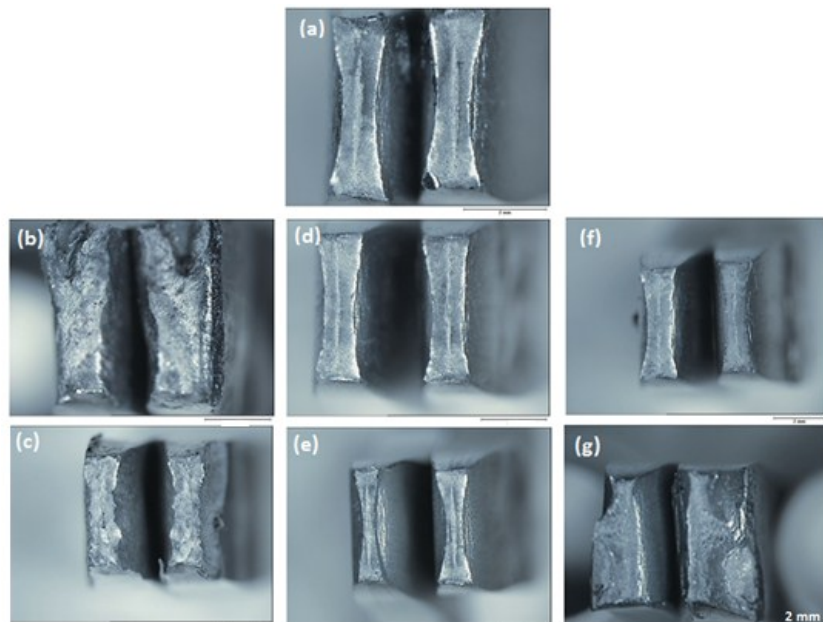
Macrograph of fracture surfaces (a)BM (b)F (c)FP (d)FNi (e)FNiP (f)FN2 (g)FN2P
